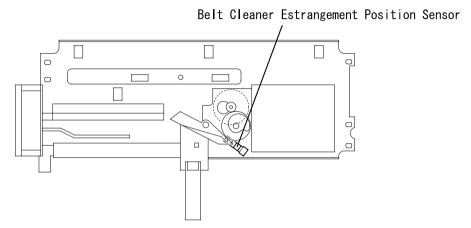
Belt Cleaner Estrangement Position Sensor Removal
